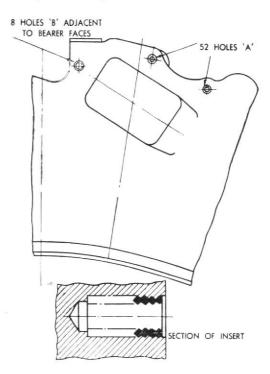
(T.R.268). Location of holes for fitting "Cross" wire inserts to diffuser casing rear
